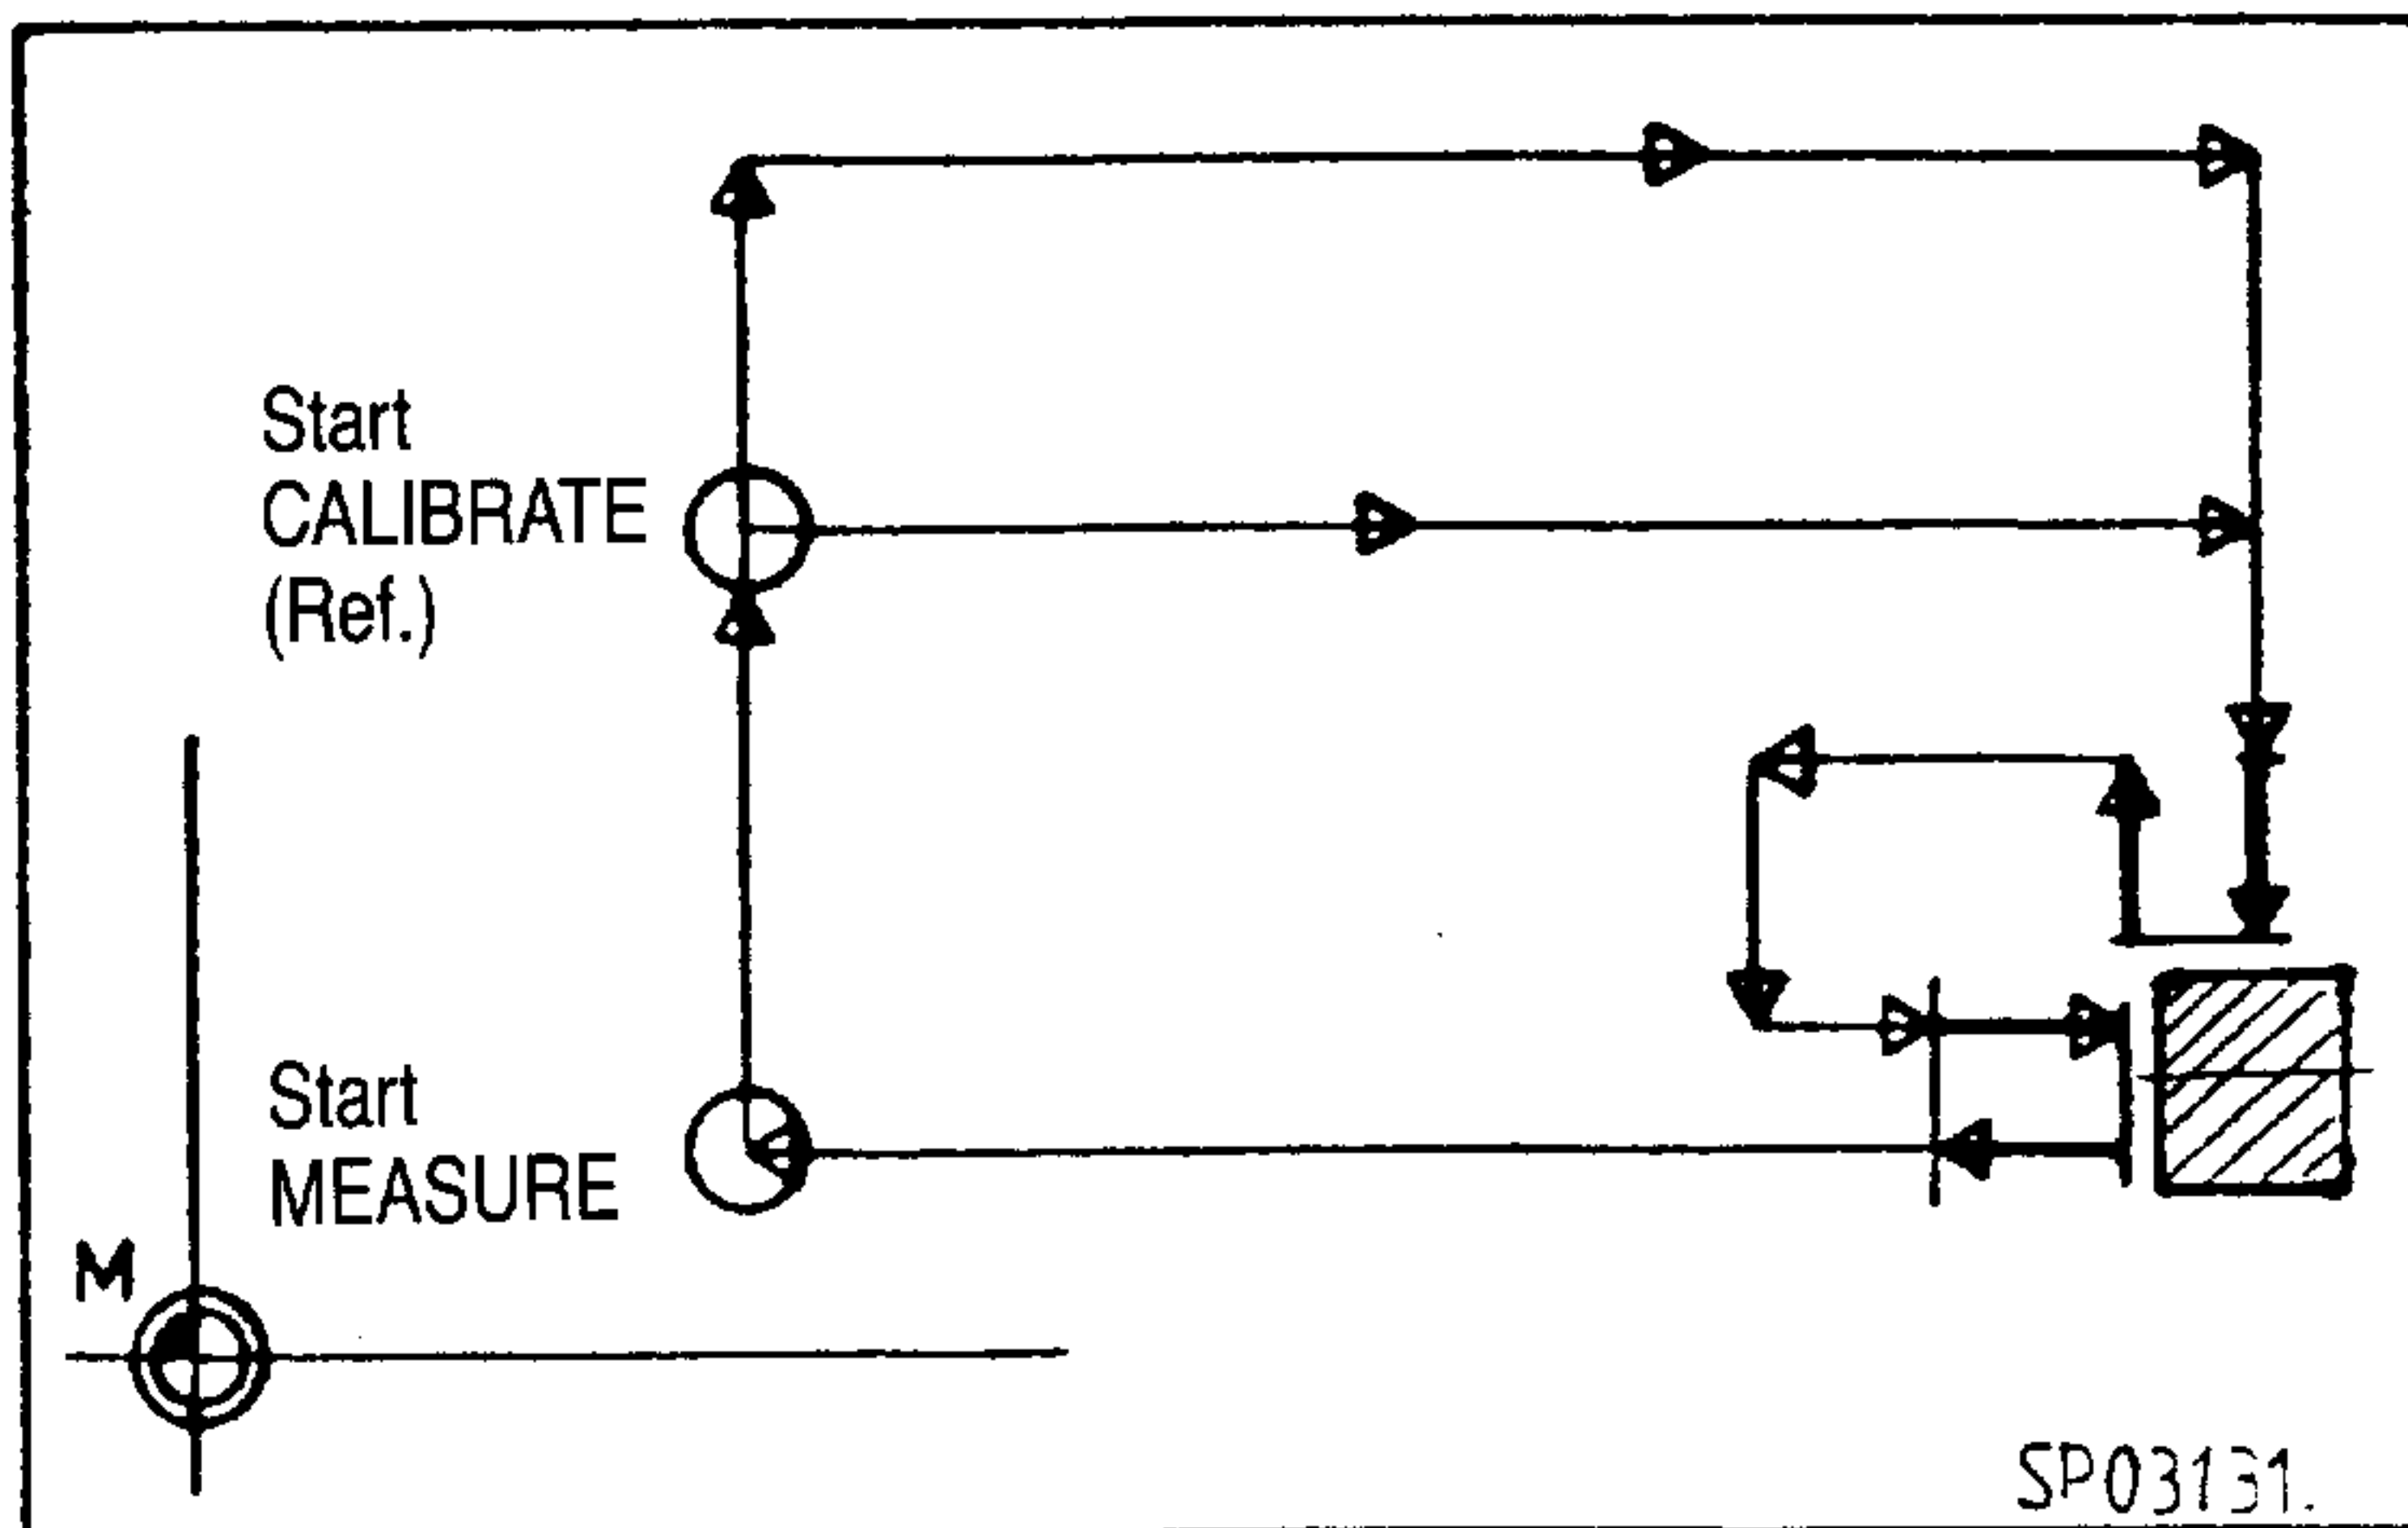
Calibrate tool probe measure tool (Z axis mirror-imaged)
